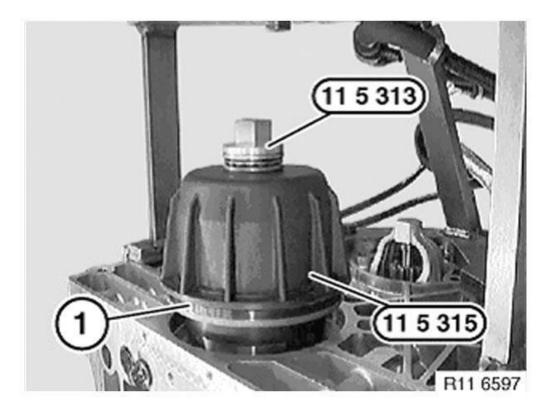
Pressing/Removing Radial Shaft Seal Courtesy of BMW OF NORTH AMERICA, INC.
